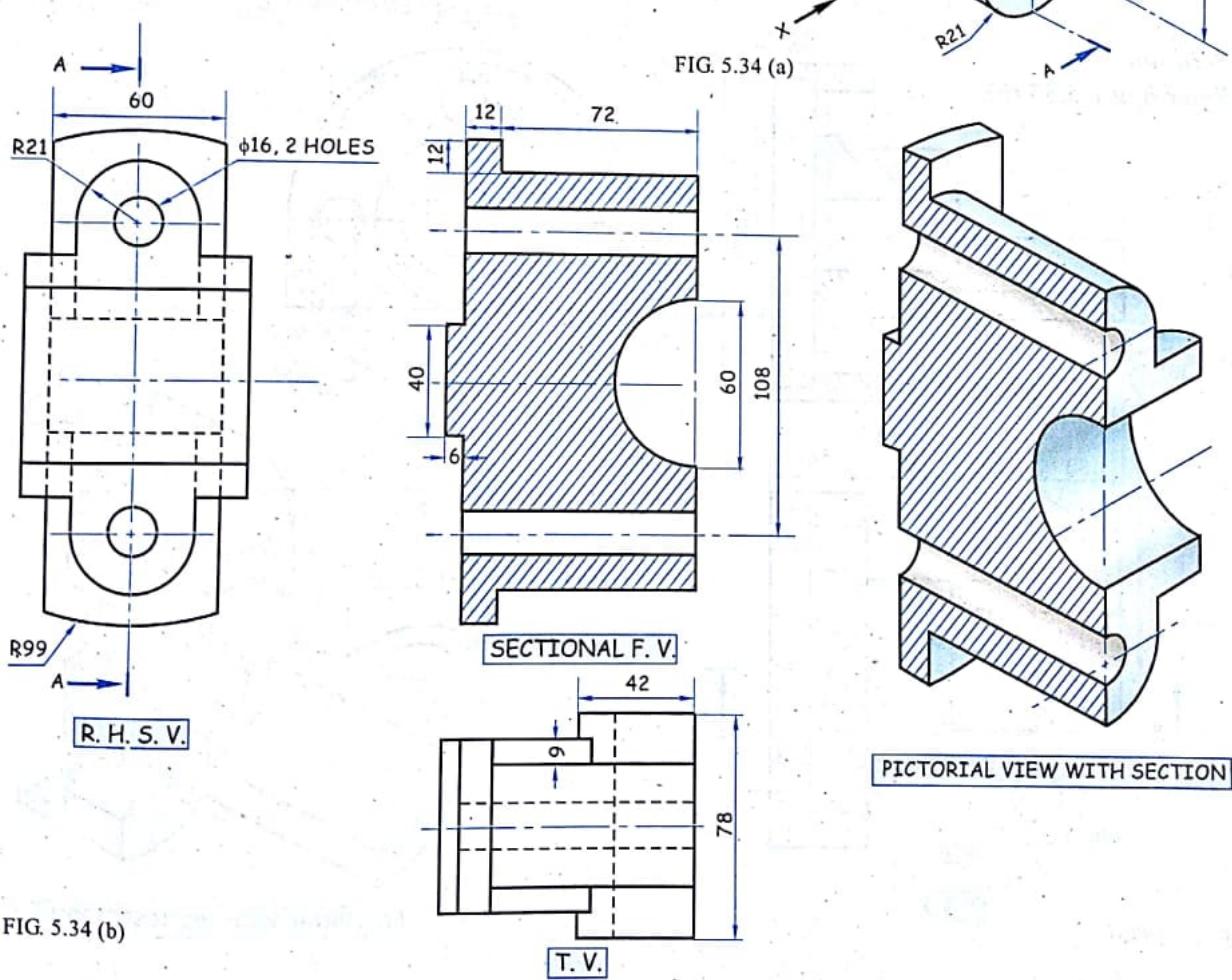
(a) shows a pictorial view of a Machine Part. Draw to scale full size, the following views by using the first angle method of projection :
